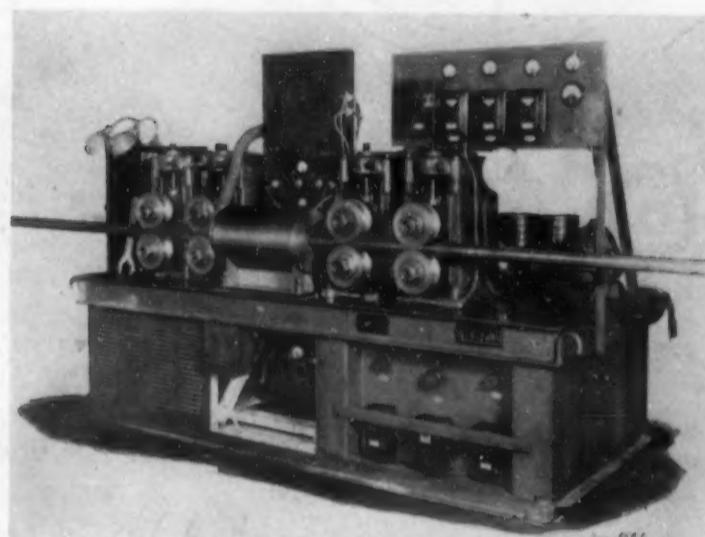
Non-destructive electrical tester for production inspection in tube mill with power feed rolls.
